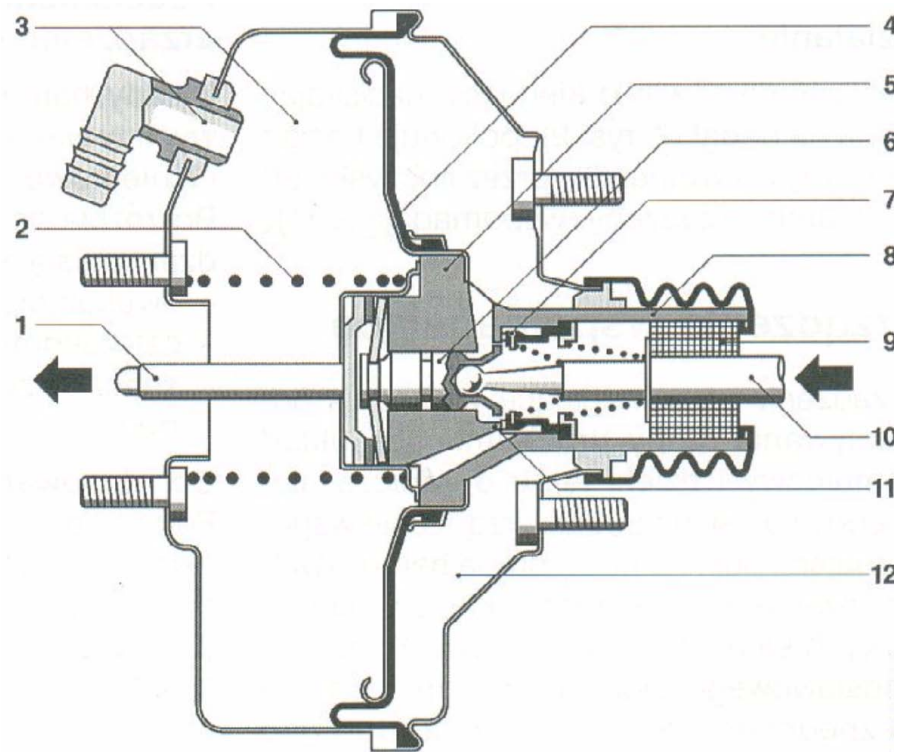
Two-chamber brake booster: 1 – pushrod (force acting on the master cylinder), 2 – spring, 3 – partial vacuum chamber, 4 – membrane with shield, 5 – work piston, 6 – control piston, 7 – valve, 8 – valve housing, 9 – air filter, 10 – piston rod, 11 – valve seat, 12 – work chamber. [2]
